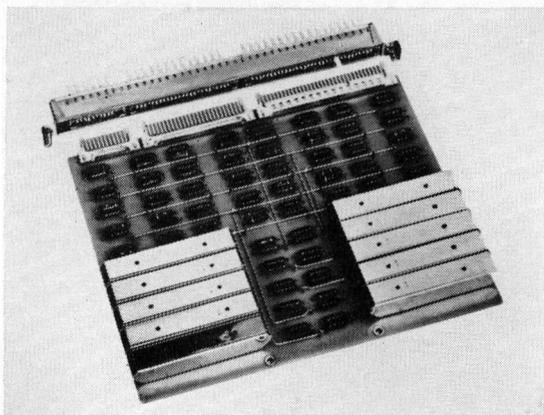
Typical approved parts assembly with 3 plugs, and mating sockets mounted in socket support.
